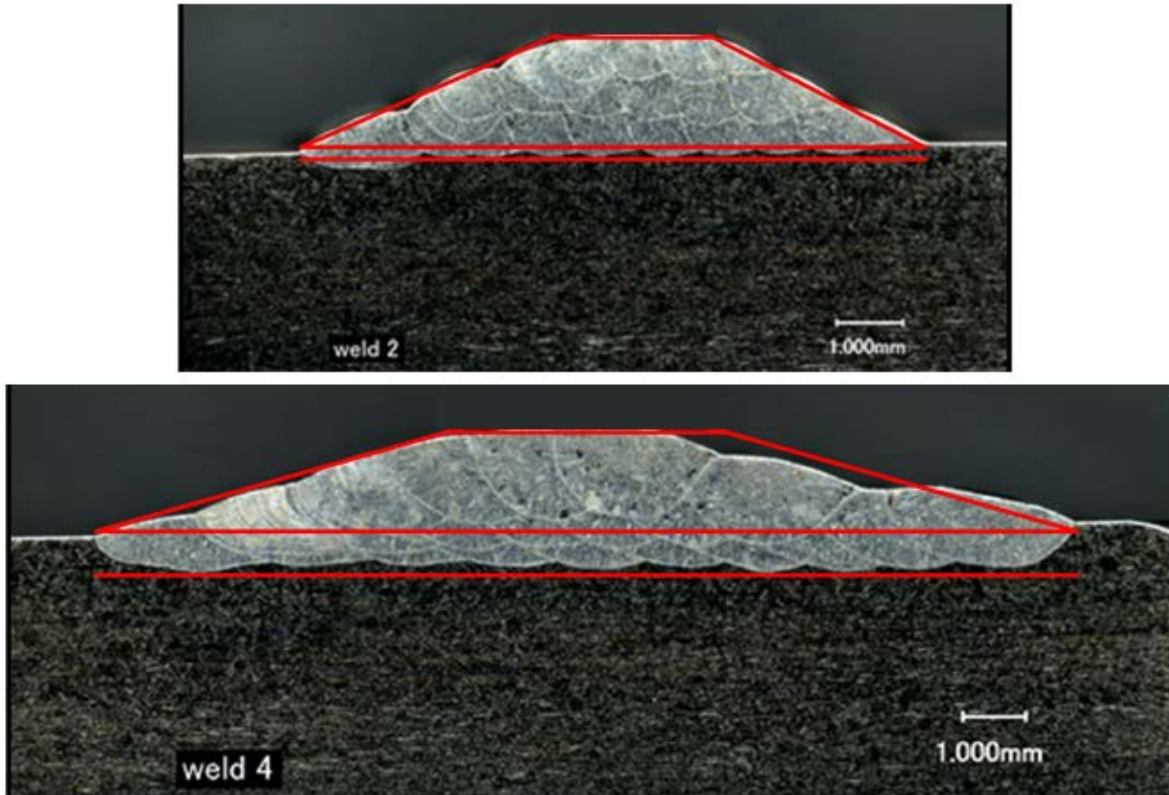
Cross-Sections of LBW on Unirradiated 304 Stainless Steel; Low Heat Input (top), High Heat Input (bottom)
